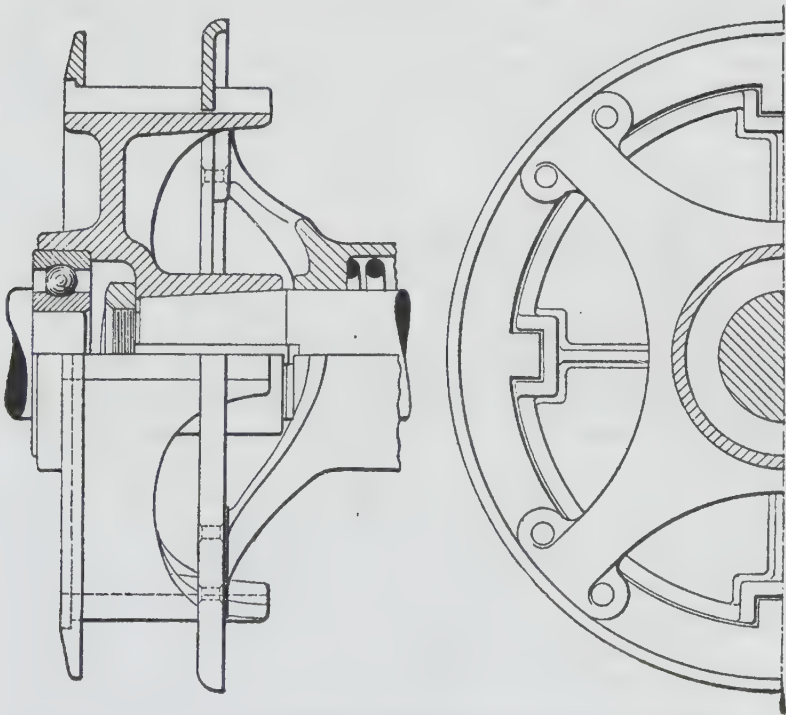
SKELETON FORM INNER DRUM AND PRESSER.
